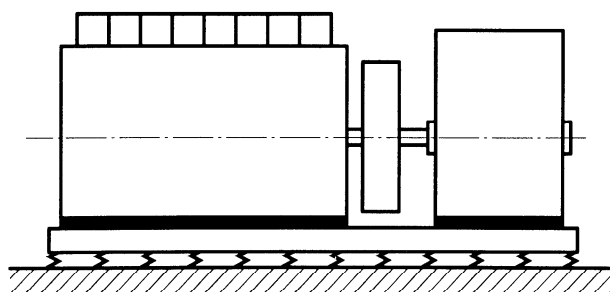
Engine and generator rigidly mounted on resiliently mounted base frame
